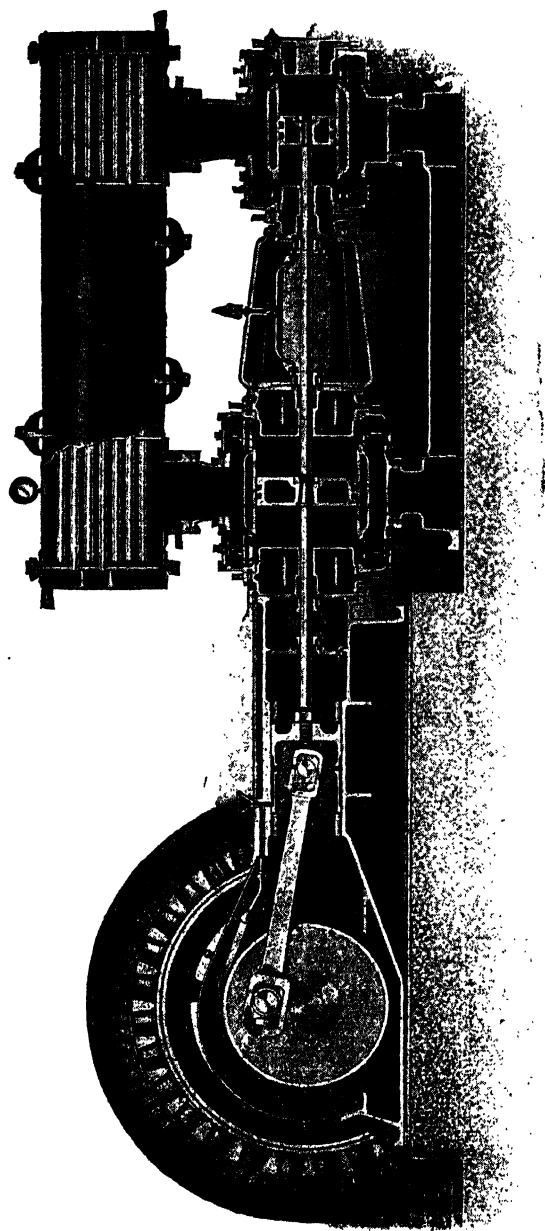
MOTOR-DRIVEN TWO-STAGE COMPRESSOR
